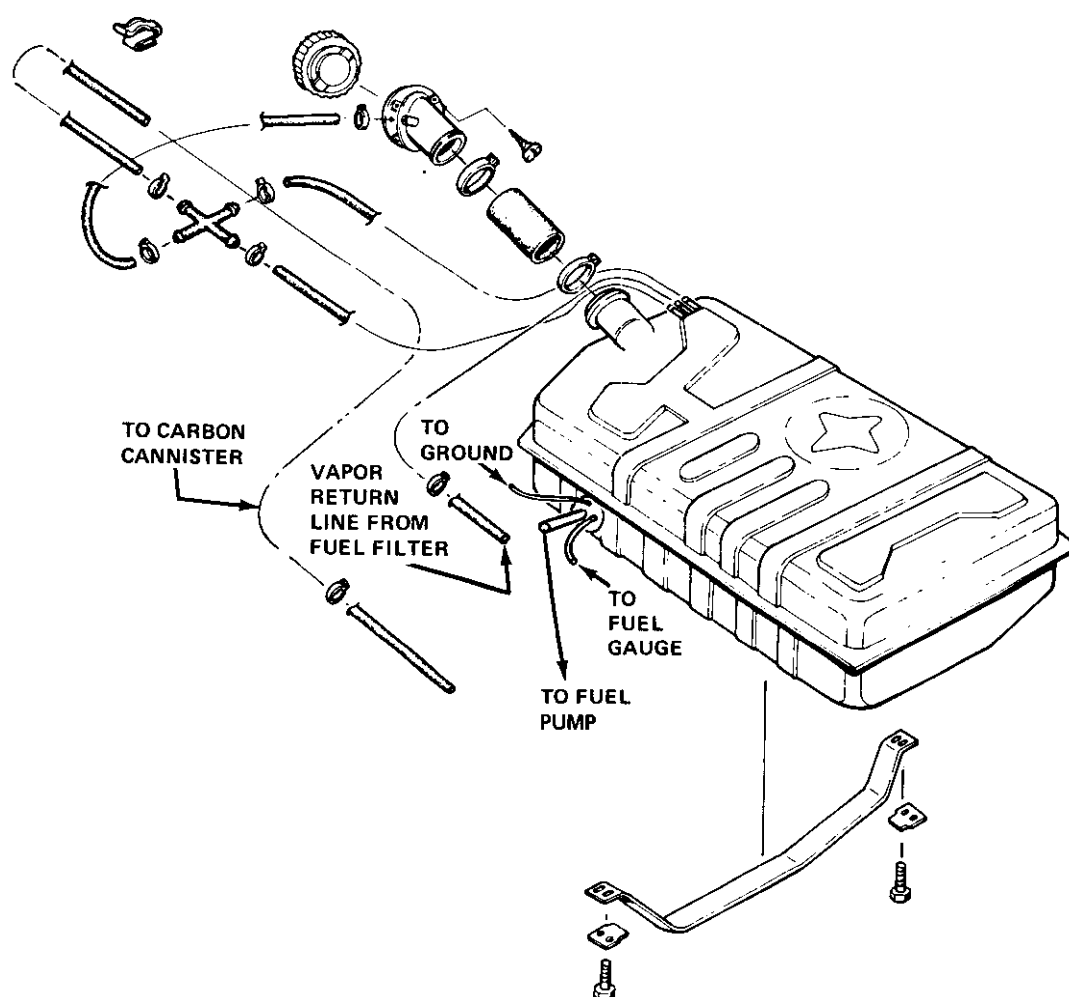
C-4 Exploded View of Opel 1900 and Manta Fuel Tank
